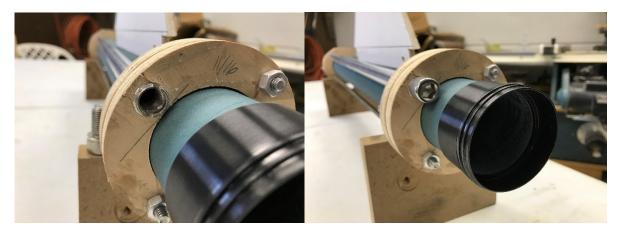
Mockup of Motor Retainer, Ballets Bay and Motor Mount.
